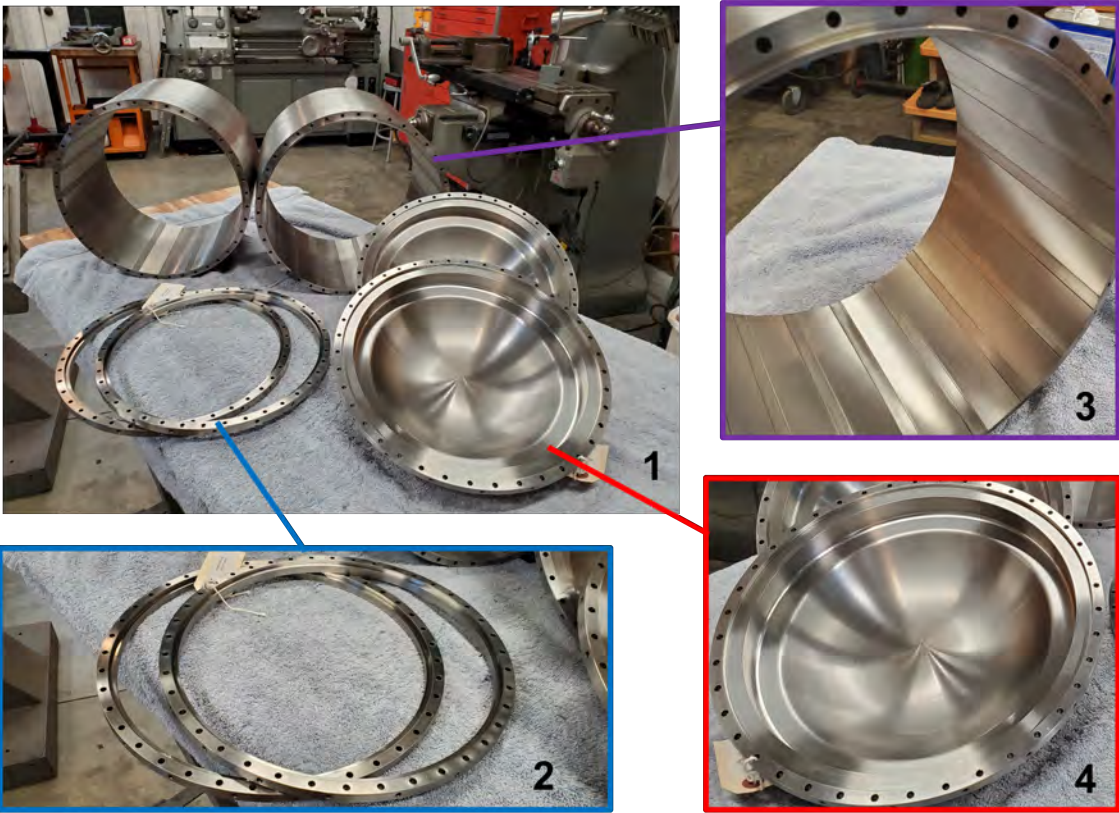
1) Structural components of two electric machine rotors. 2) Retaining rings. 3) Rotor drum. 4) Forward end bell.
